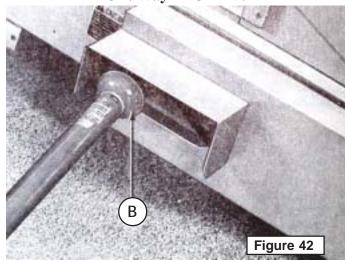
Attach PTO assembly to drive shaft at "B" using a 5/16" x 2-1/2" machine bolt.
